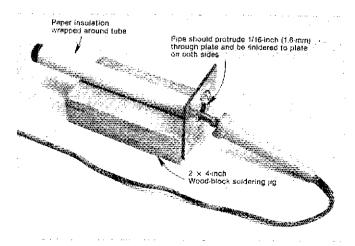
The tube-support plate and tube are soldered together using a 2 × 4-inch block of wood as a jig. The block is checked for squareness, and a groove is cut down the middle. (See Fig. 3.) Paper is wrapped around the tube to reduce heat loss during the preheating process.
